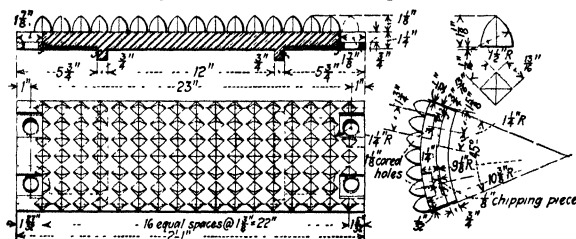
THE OLD-FASHIONED SPEAR TOOTH AND ITS ARRANGEMENT ON THE SEGMENTS.
